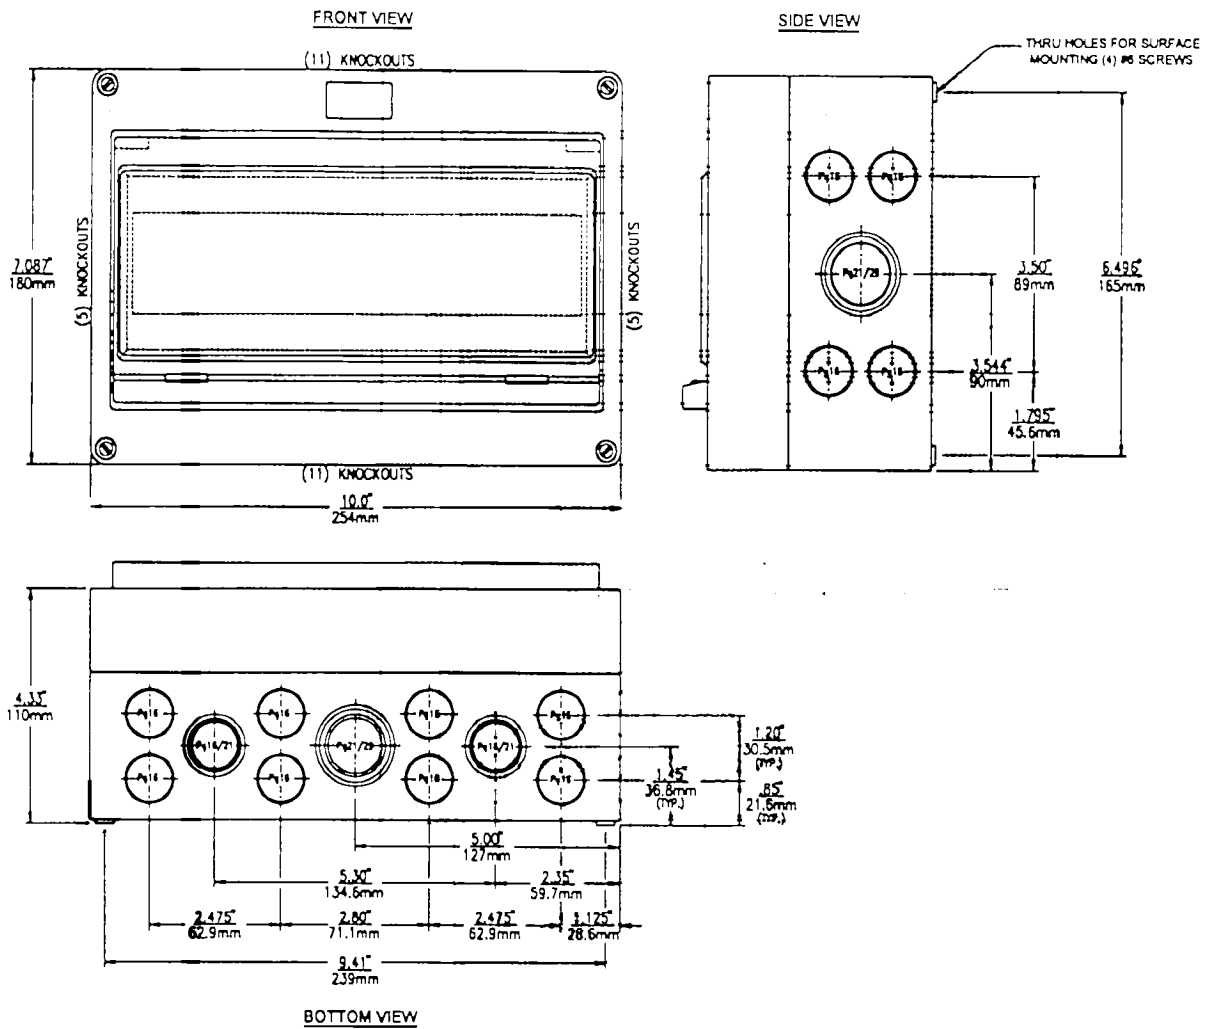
Three Module System Enclosure Dimensions (80-0007R, Rev-A)
